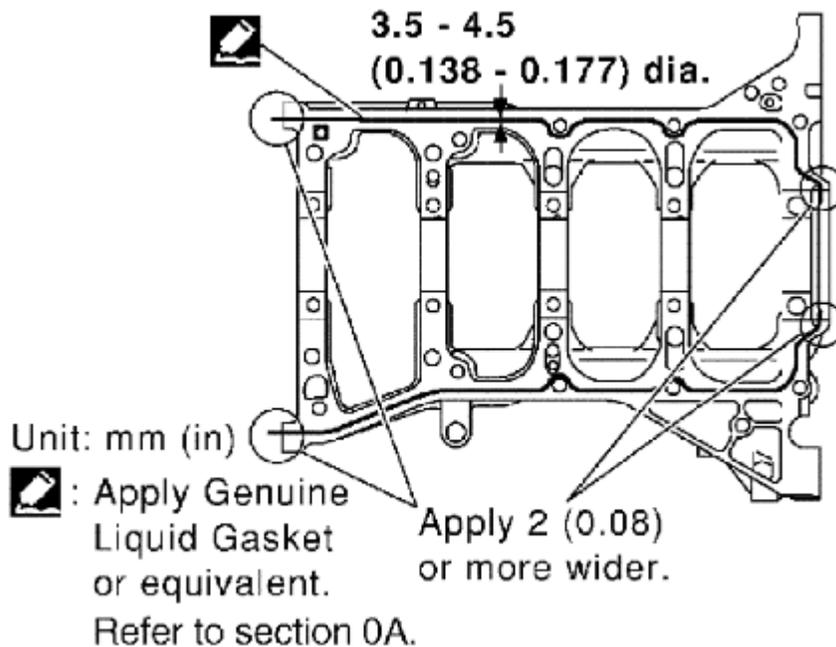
Identifying Liquid Gasket Applying Specifications On Lower Cylinder Block
